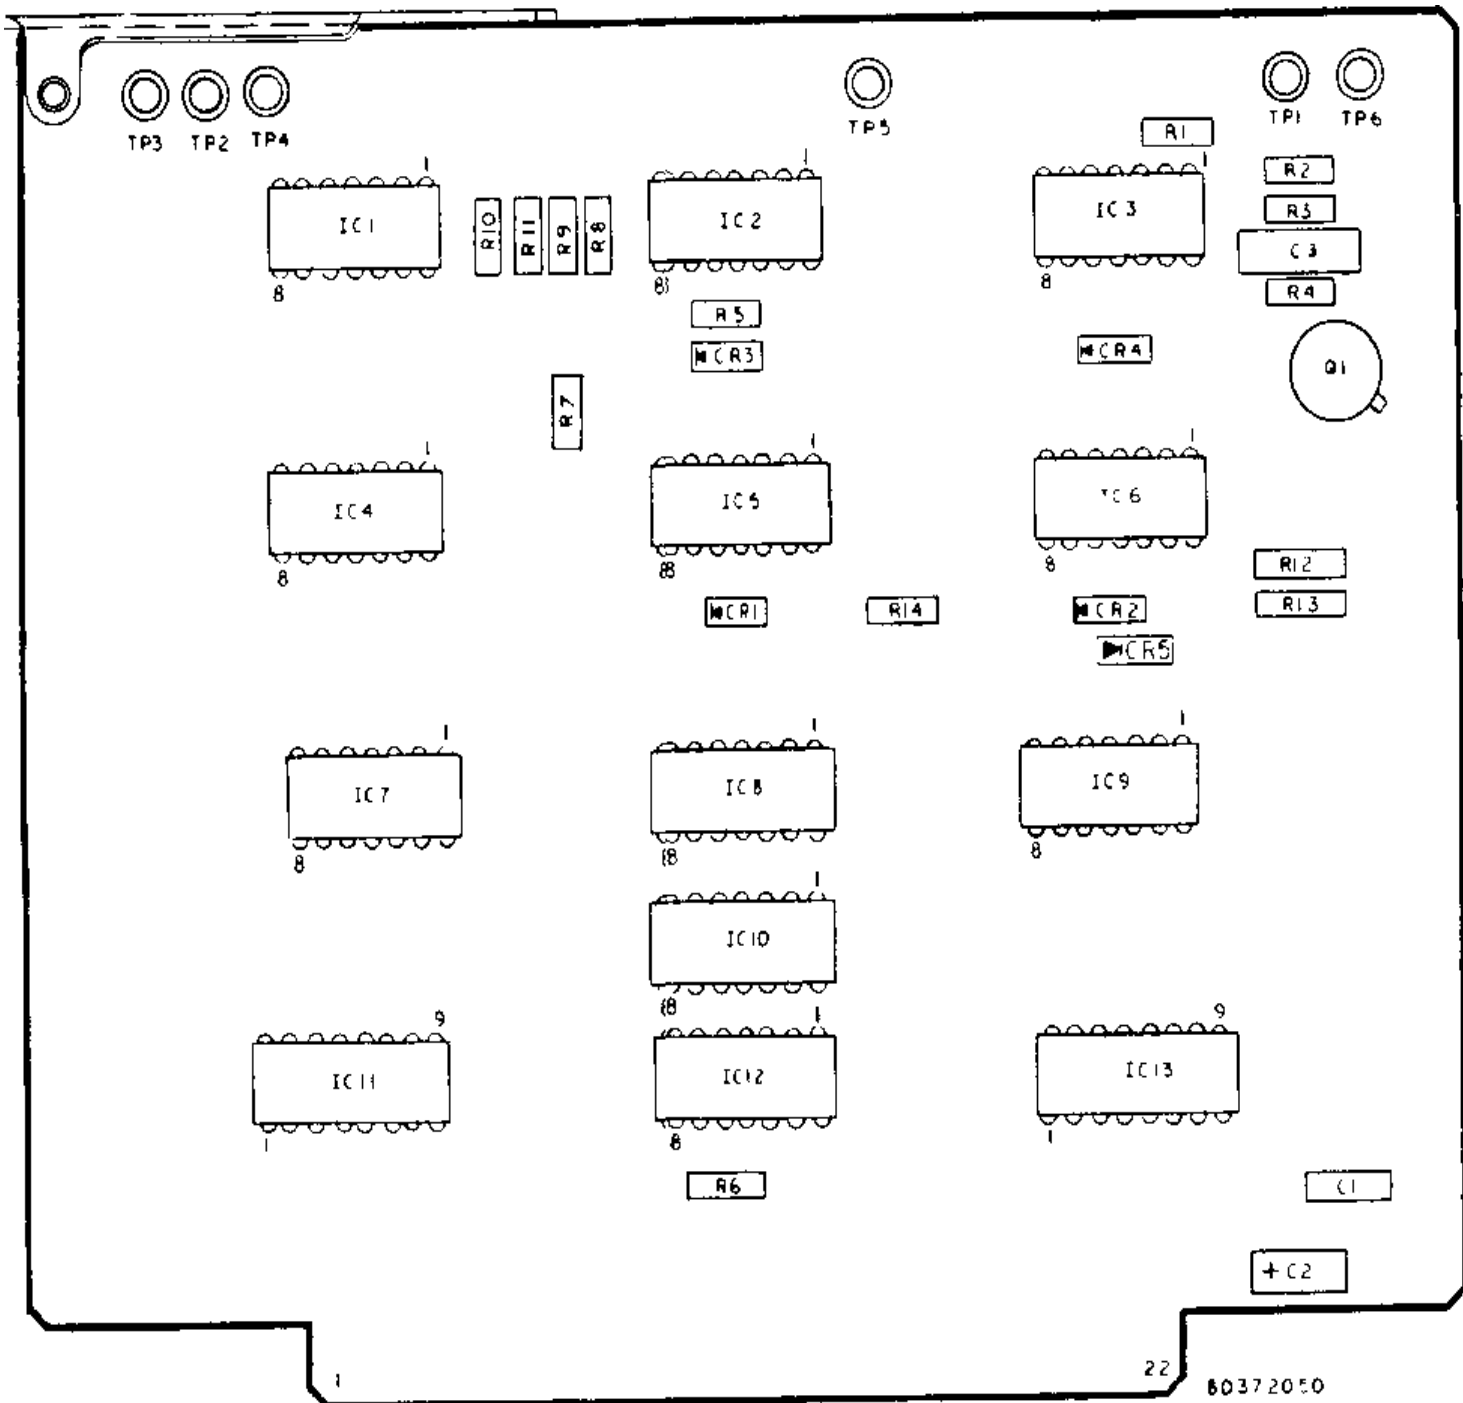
Component Locations - FOX Message Generator, Assembly A5
